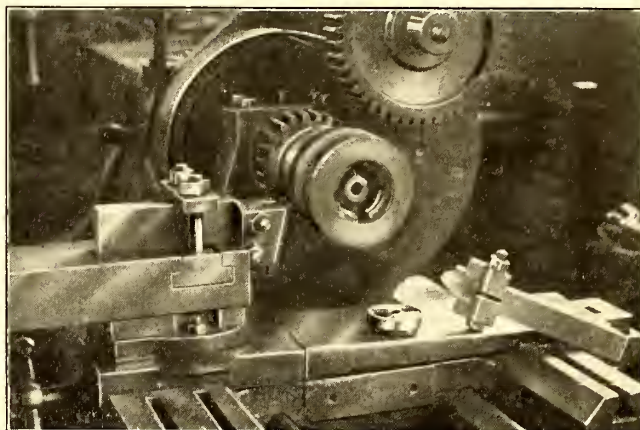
TROLLEY WHEEL CHUCK AND FORMING TOOL FOR OUTSIDE SURFACE
